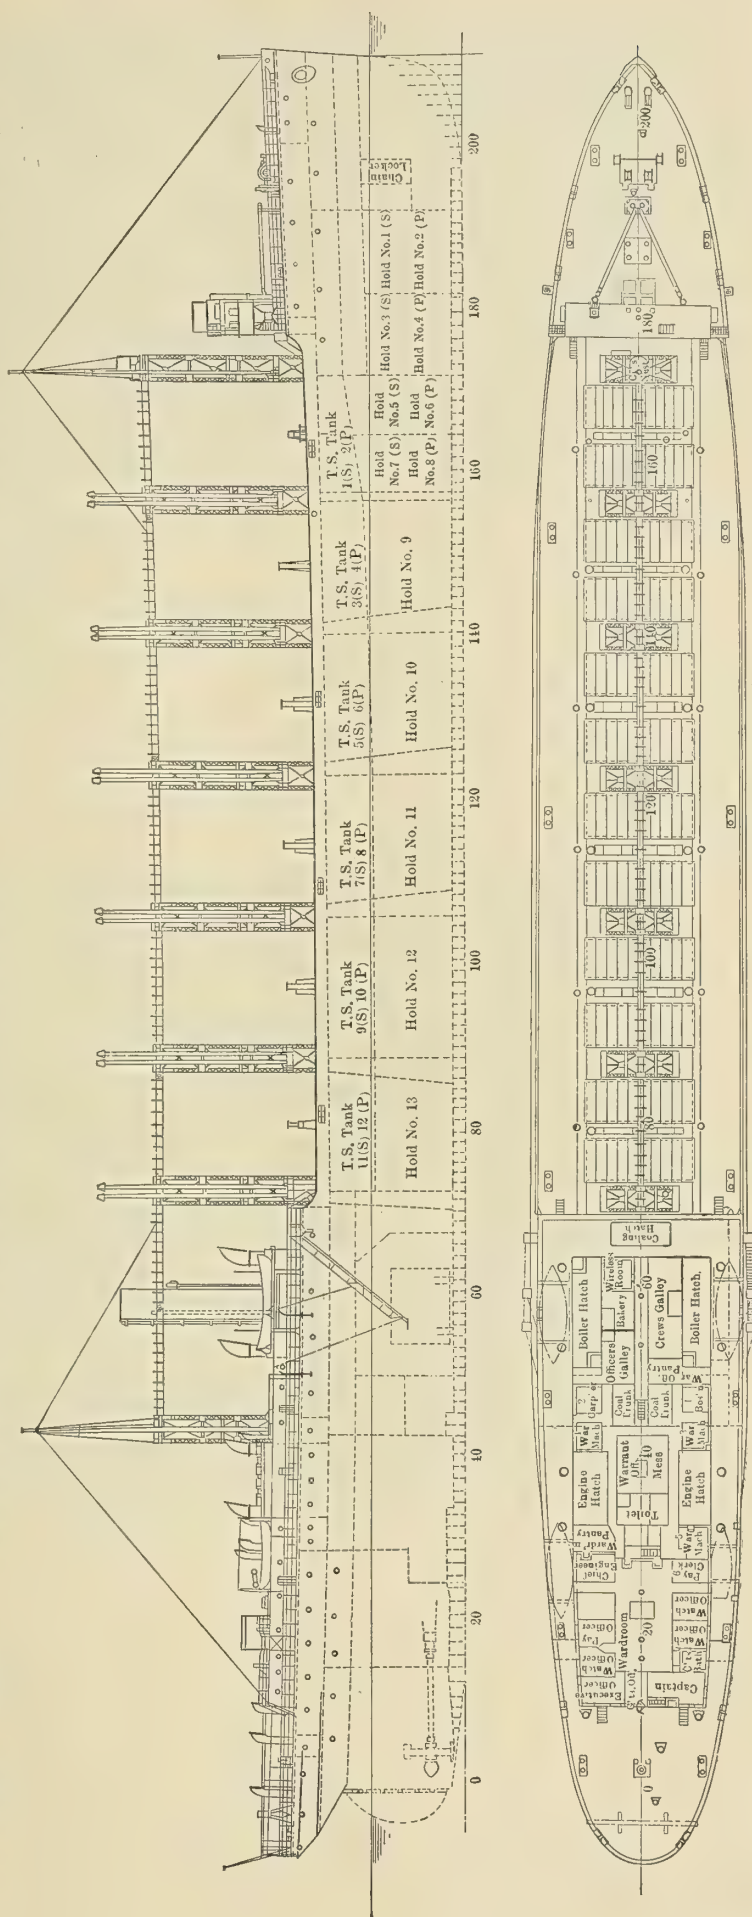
DECK PLAN AND PROFILE OF THE NEPTUNE
